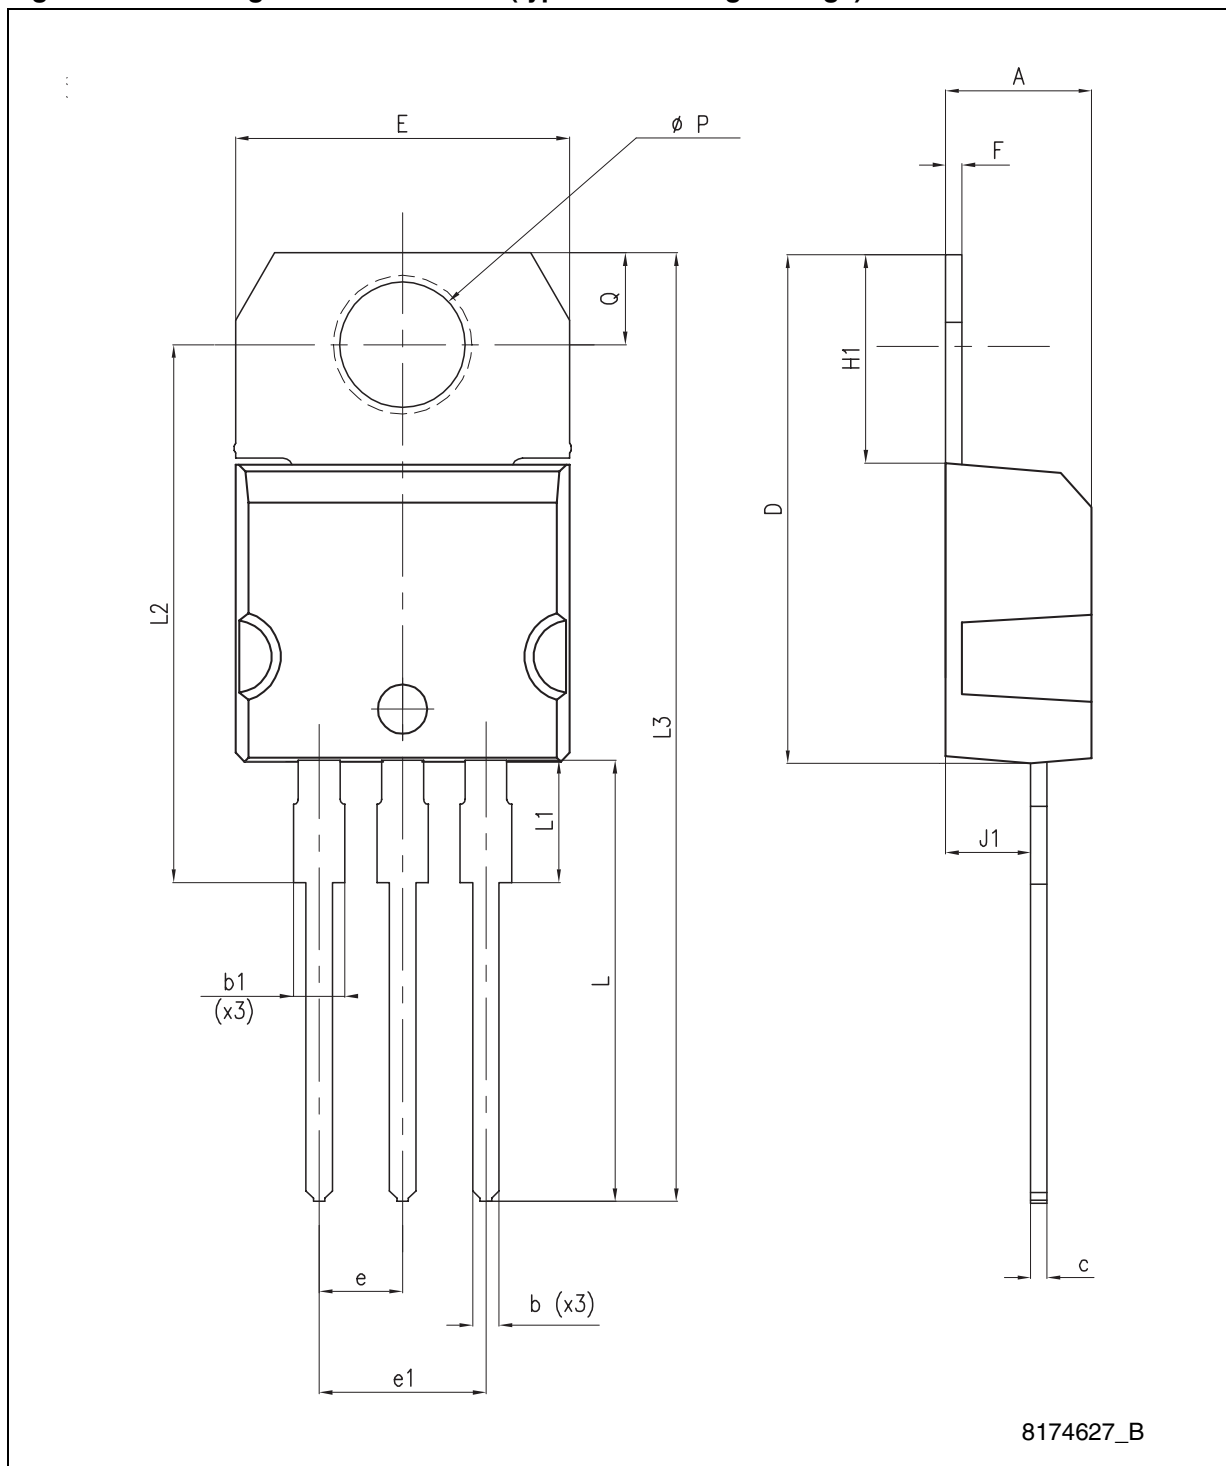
Drawing dimension TO-220 (type STD-ST Dual Gauge)
